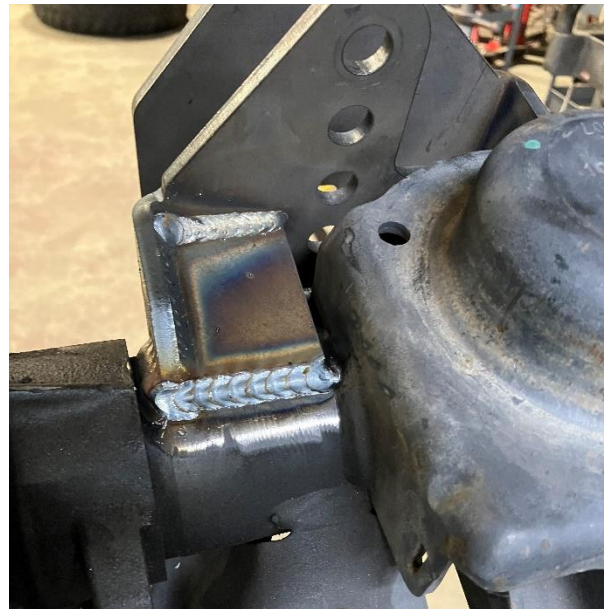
Vertical Weld on the Spring Perch
